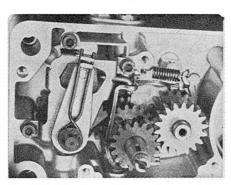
View of 4-speed transmission assembled in the left half of crankcase.
